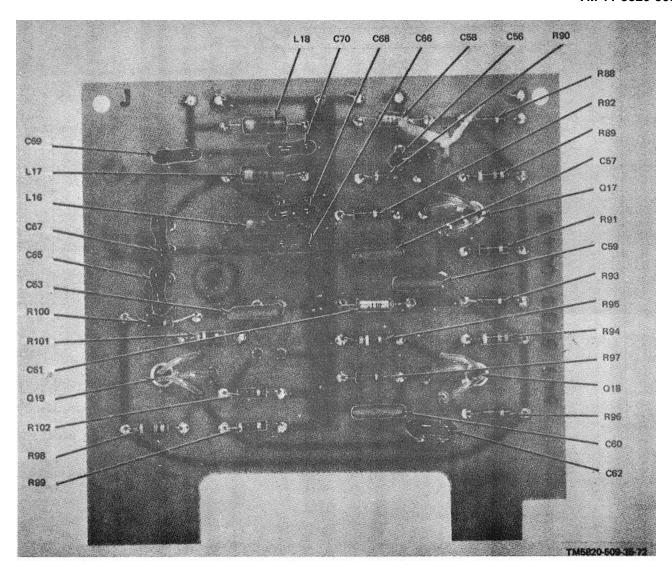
Oscillator Control C-4311/PRC 47 (A8A7), Card Assembly E4.
